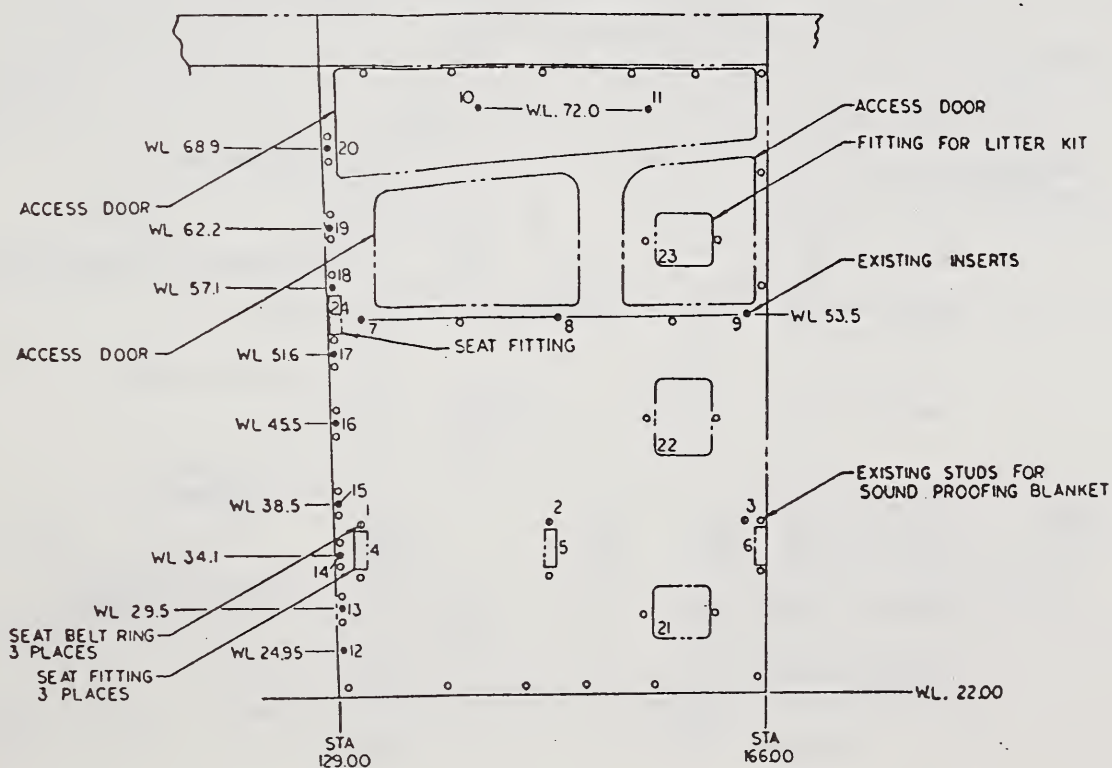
Bell 205A B.L. 14 lefthand wall fittings.
